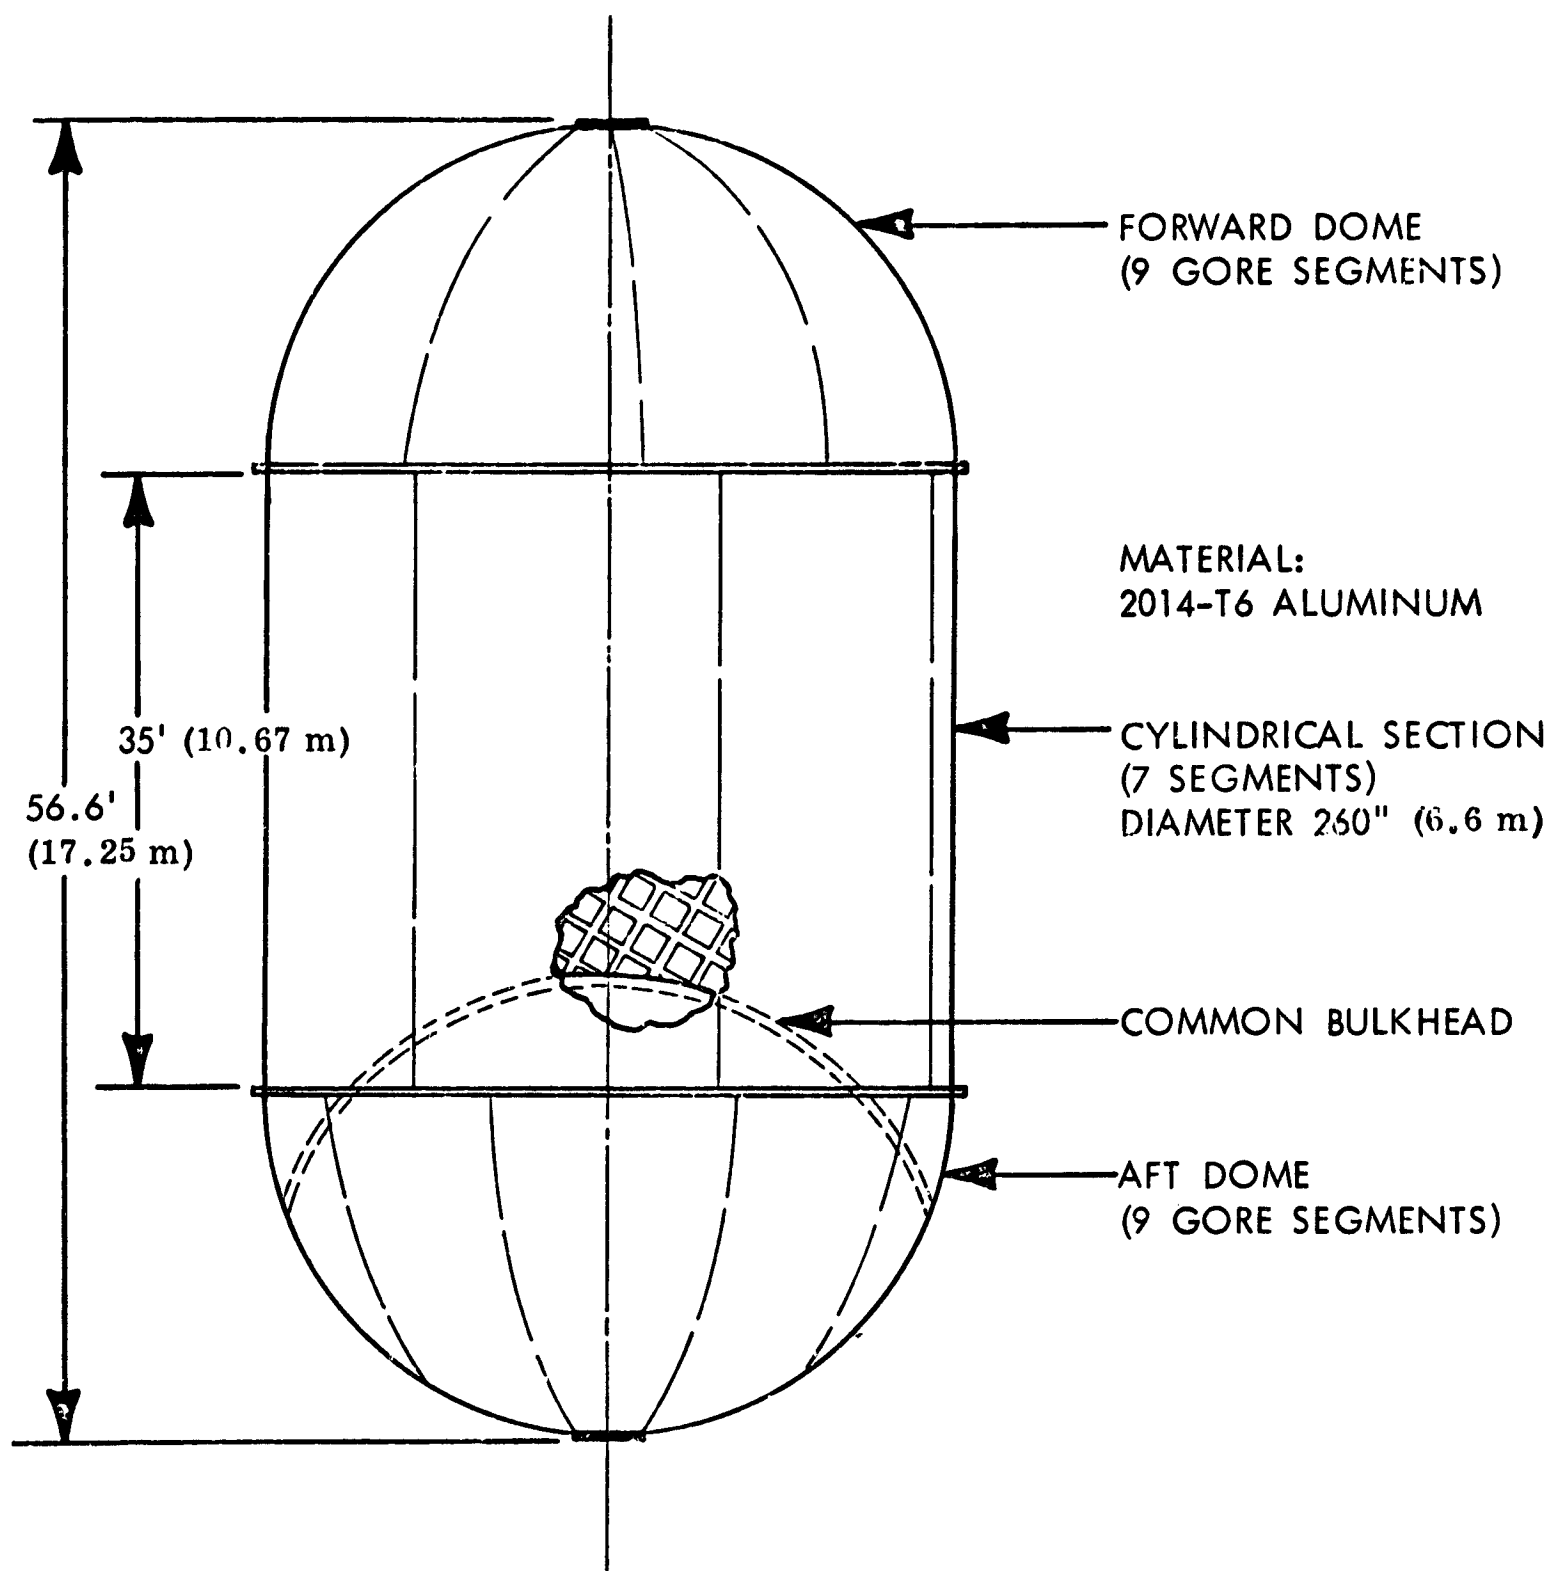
Propellant Tank Structure (Structural Element No. 2)
